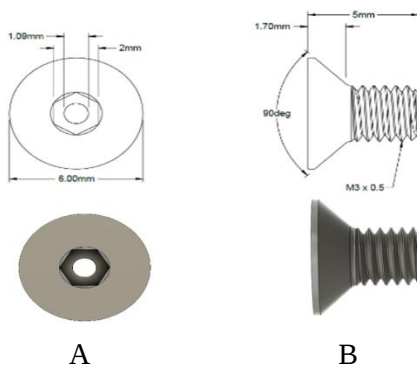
Technical drawing of second screw (A) top view (B) side view.
